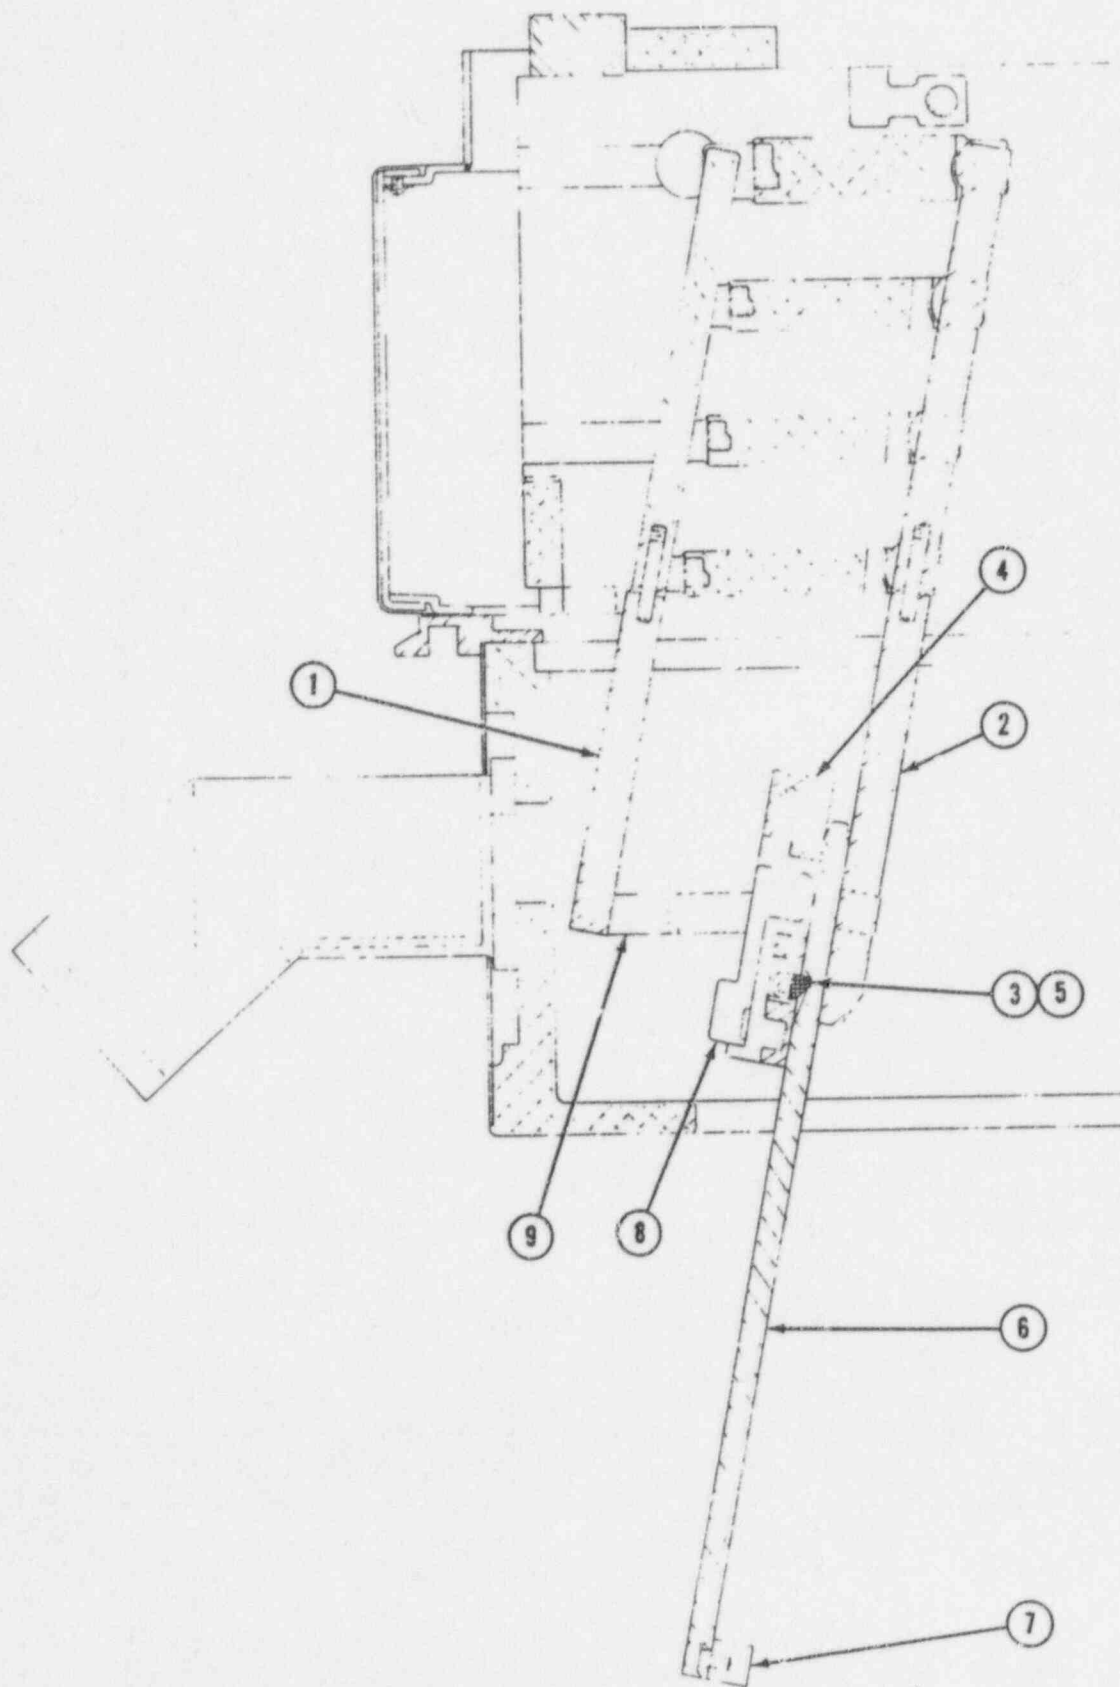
COBALT COLLIMATOR EXTENDER ASSEMBLY
